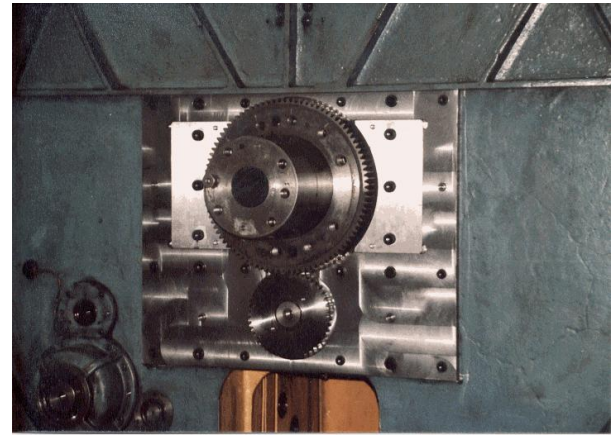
The new record. The spindle bearing, which was previously a slide bearing, we have replaced with a proven NN storage. The recessed spot where the slide bearing was in there, we have made with a precise two-part sleeve so that the bearings are assembled and disassembled. This bearing is complex with respect to spindle bearing to set them because the bias voltage depending on speed can be adjusted. This can also regulates the vibration behavior. Seen from that, one of the best, bewährtesten spindle bearing. We have machines with more than 100,000 hours, which produce properly.
